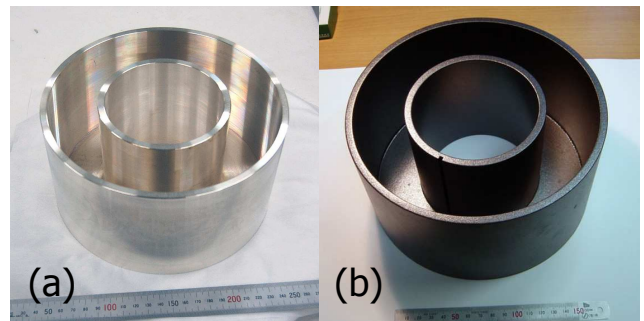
(a) Ag substrate of the coaxial magnetic shield. (b) HTS coaxial magnetic shield coated by the thin layer of Bi2212.
